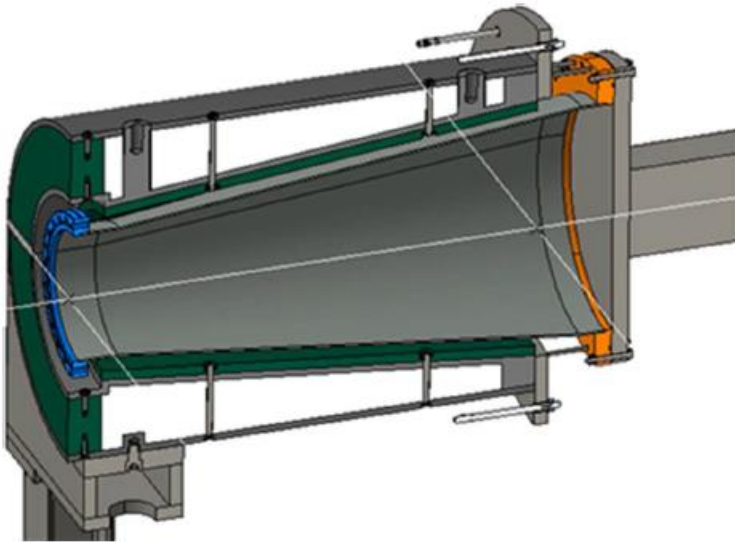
Detail showing the conical beam tube and shielding elements filling the space between tube and concrete wall.
